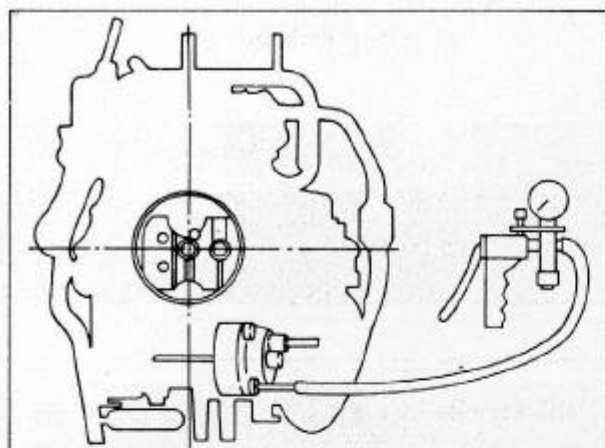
D-32 CHECKING CHOKE OPENER(2ND STEP)
